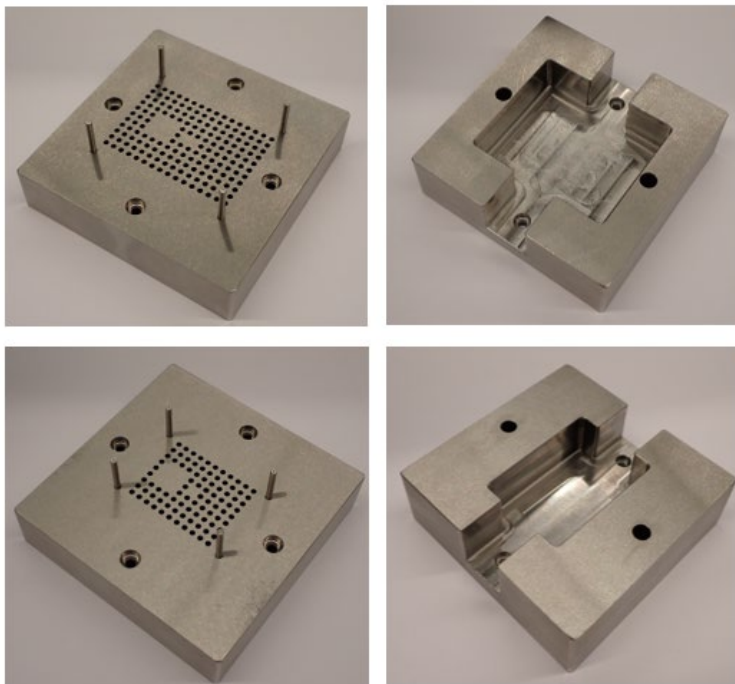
Press-in fixture for SiCPAK™ F(Bottom) and G(Top)
